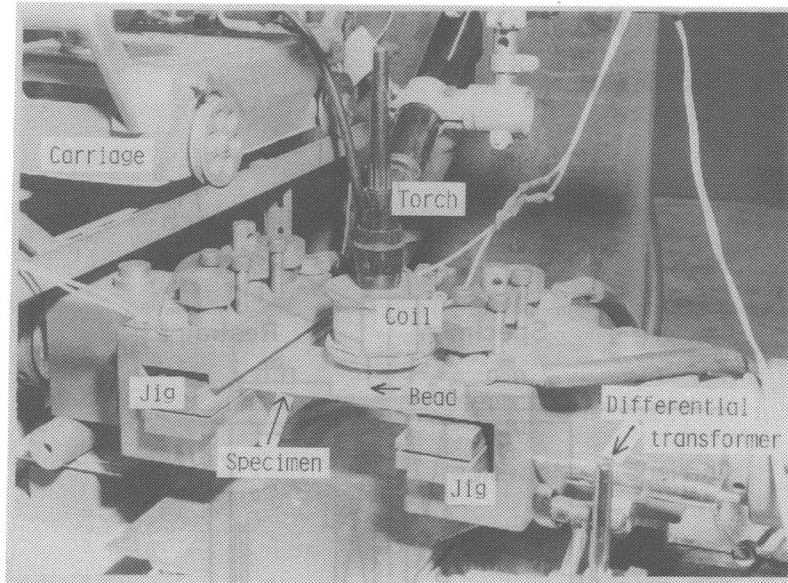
Arrangement of GTAW torch, magnetic coil and specimen on tensile cracking tester.
